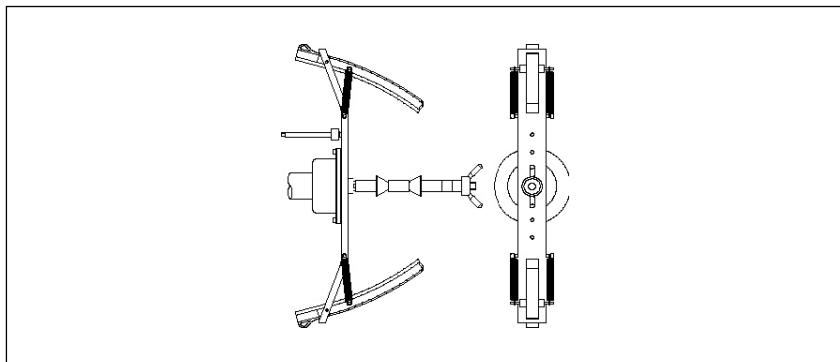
Arranging calibration balance weight on the inner side of the fixture (in Cal2 stage)
